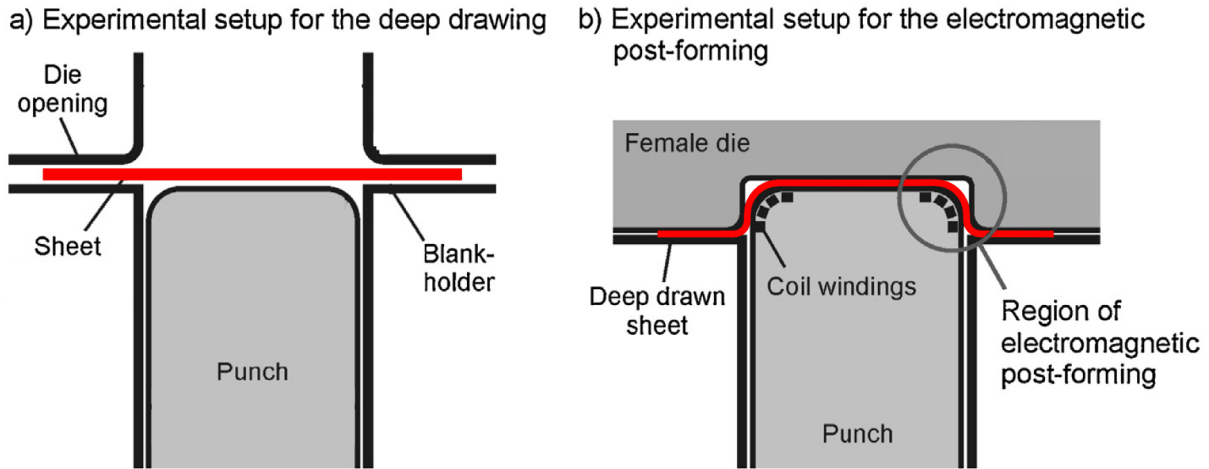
Exemplary experimental setup for a combined deep drawing and electromagnetic forming process [3]
